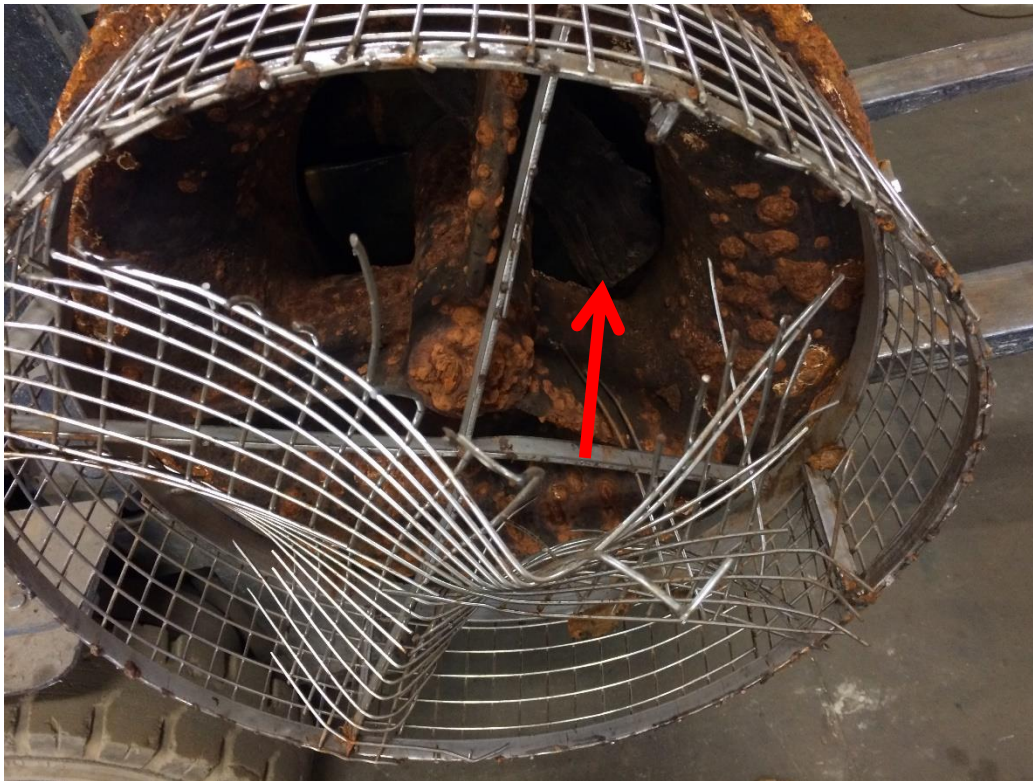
The basket was found to be destroyed upon arrival, and a large piece of wood was found lodged in the impeller. The basket strainer will need to be replaced.
